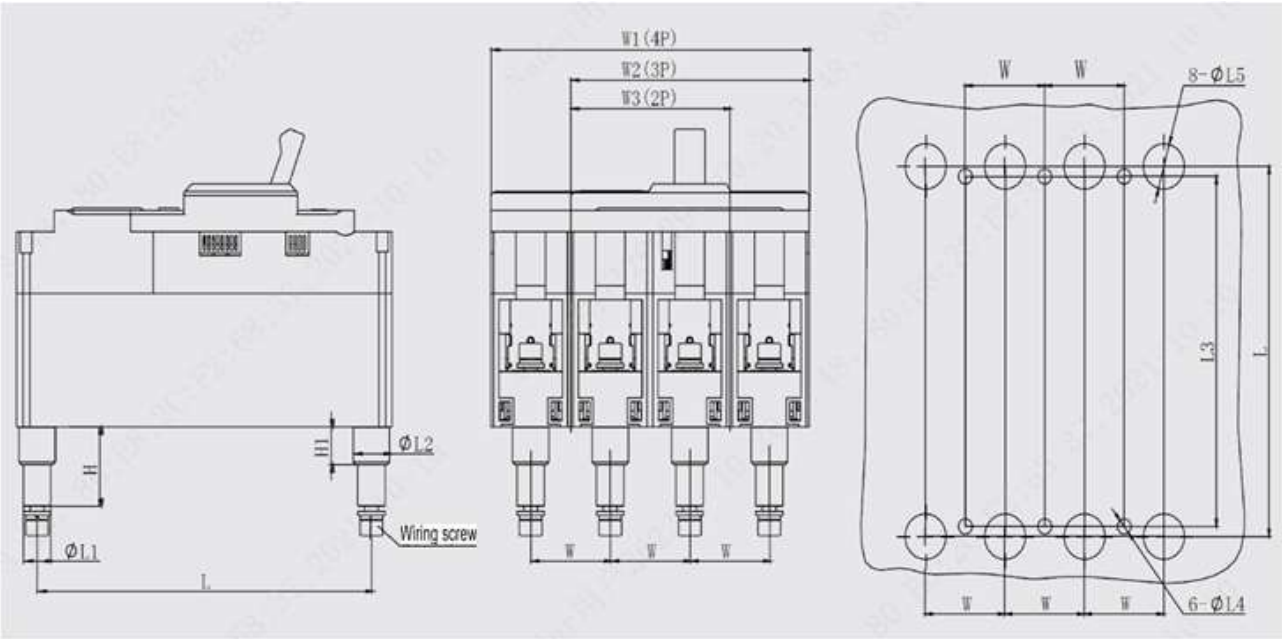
2P、3P、4P outline dimension drawing of rear wiring board
